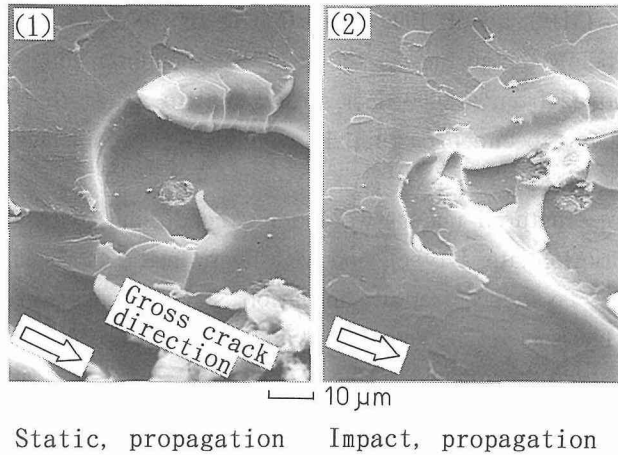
Fracture surface of model specimen, M10, P-type,
